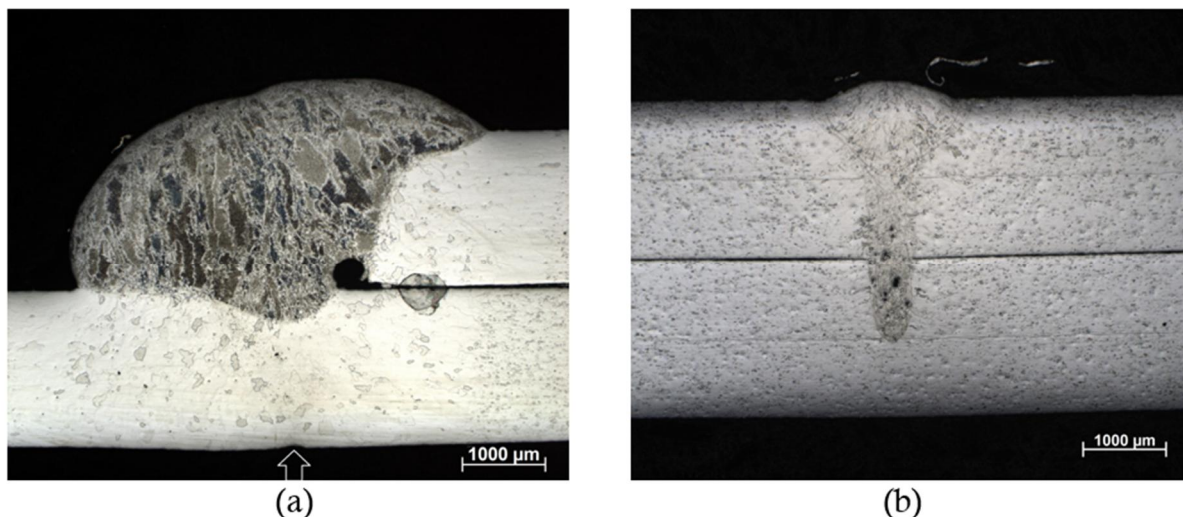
Optical micrographs of (a) GMAW and (b) LBW welds. The arrow indicates the notch at the bottom surface of the component.
